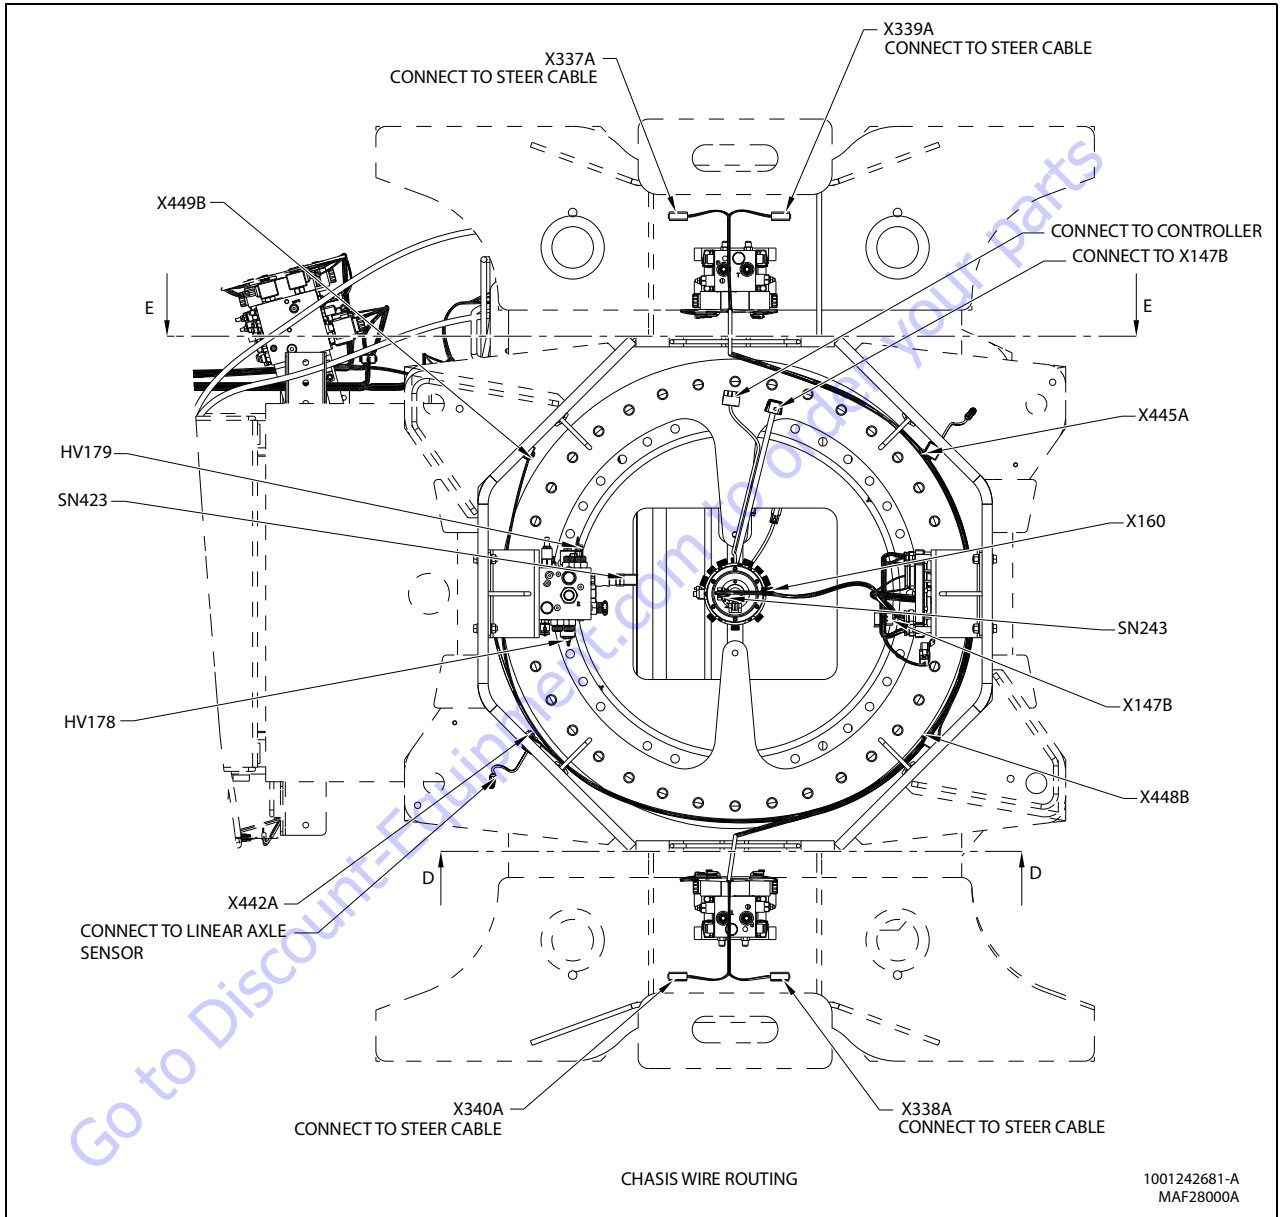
Electrical Installation (T4F) - Sheet 6 of 11
